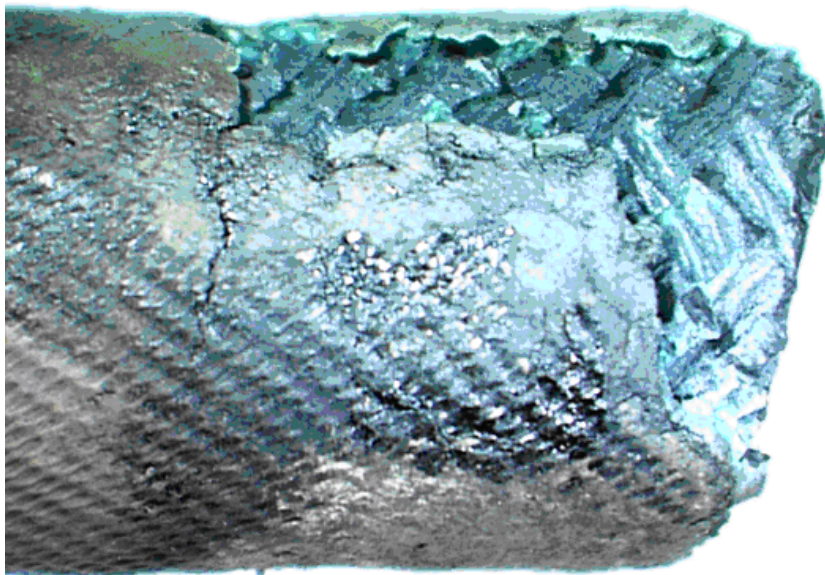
A side view of the fracture face of engine No. 3's lube oil monitor hose.
